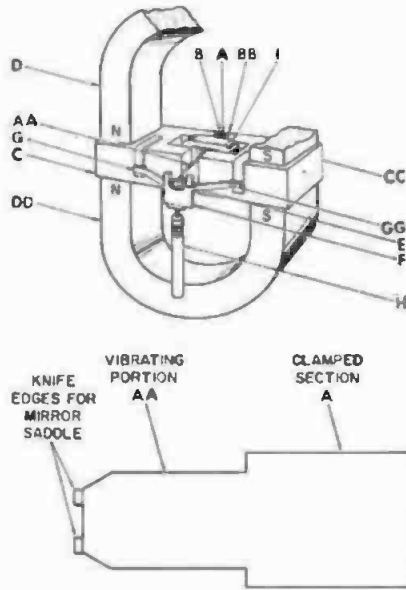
A. Recording galvanometer Model MI-10751 manufactured by RCA and used in their photographic film recorders. (Courtesy, Radio Corp. of America, and Journal of the SMPTE)
